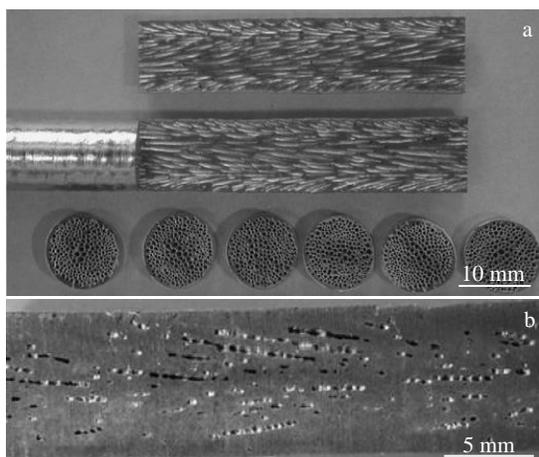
Specimens of Gasar porous stainless steel (a) and carbon steel (b) fabricated by the continuous zone melting technology^[25,26]
